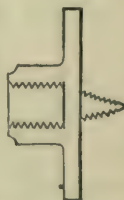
, a chuck for flat work, where a hole in the centre would be detrimental. It is a face-plate with three or more small spikes projecting from its surface to penetrate the material to be wrought, which is held against it by the back centre.
